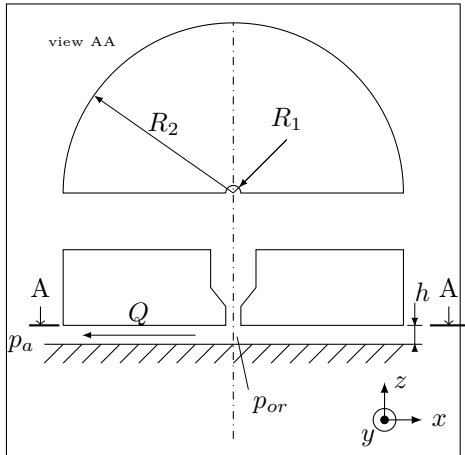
Schematic drawing of a hydrostatic thrust bearing.
